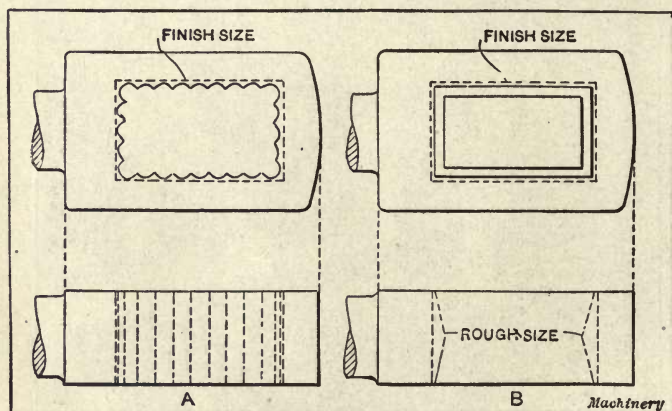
(A) Rod End Blocked Out by Drilling. (B) Rod with Forged Hole
